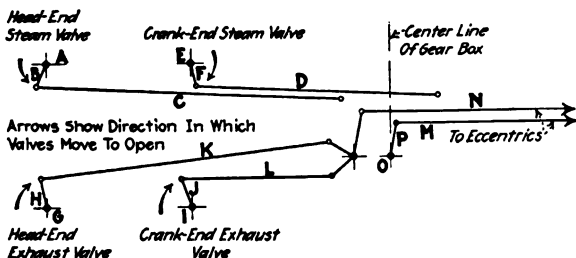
Diagram of valve gearing of Ridgway simple four-valve engine.
